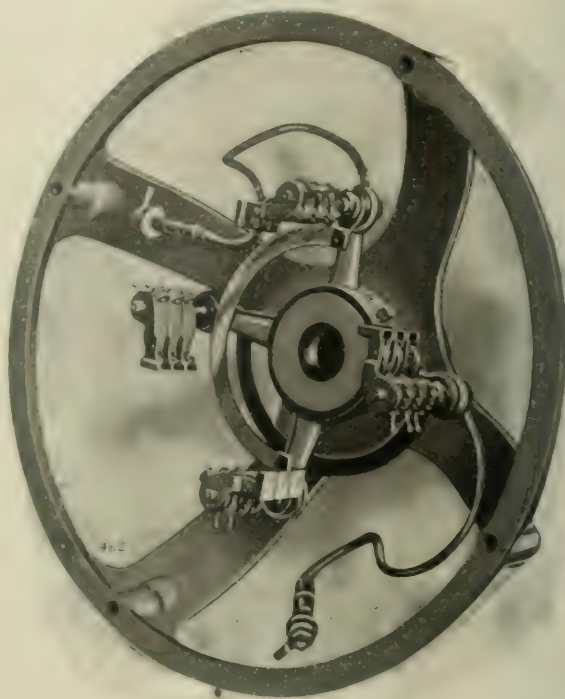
MOTOR BEARING BRACKET AND BRUSH HOLDER
